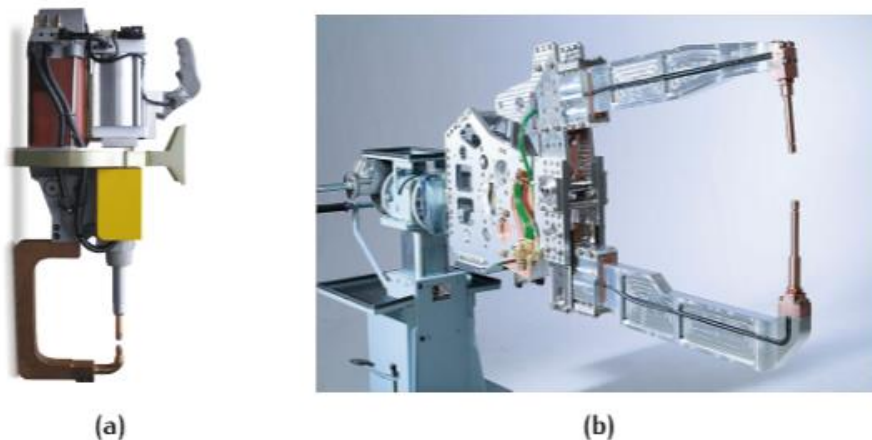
Different shapes of a welding gun. (a) C-type [4]. (b) X-type [5].
